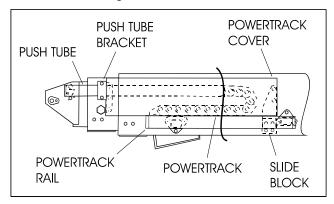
Reassembly of Components - Boom Powertrack Assembly
